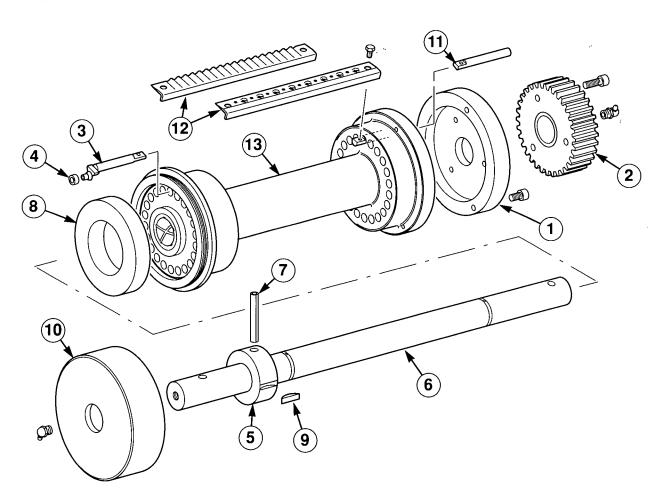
Crosscut spindle assembly: 22 knives. (1) Drive Cap, (2) Gear, (3) Crank Pin, (4) Roller, (5) Cam Hub, (6) Shaft, (7) Spring Pin, (8) Cam, (9) Woodruff Key, (10) End Cap, (11) Idler Pin, (12) Knife, (13) Spindle.
